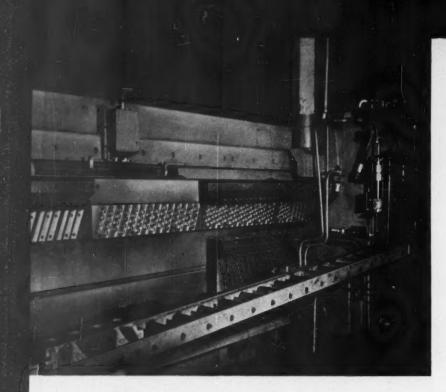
Close-up view of the four broaches mounted in opposed pairs on the horizontal ram of the two-way broaching machine shown in the heading illustration
